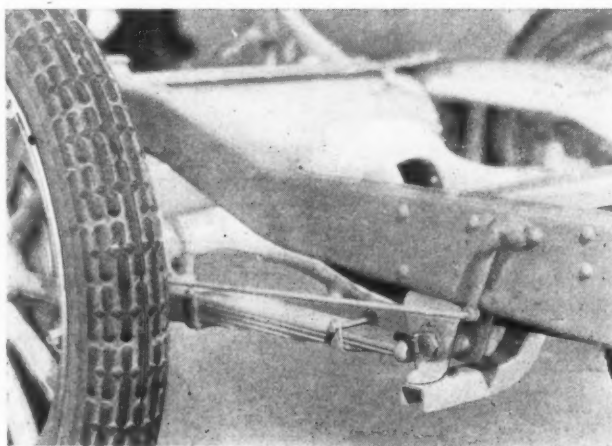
Method of supporting the front rear spring brackets on the Cleveland
